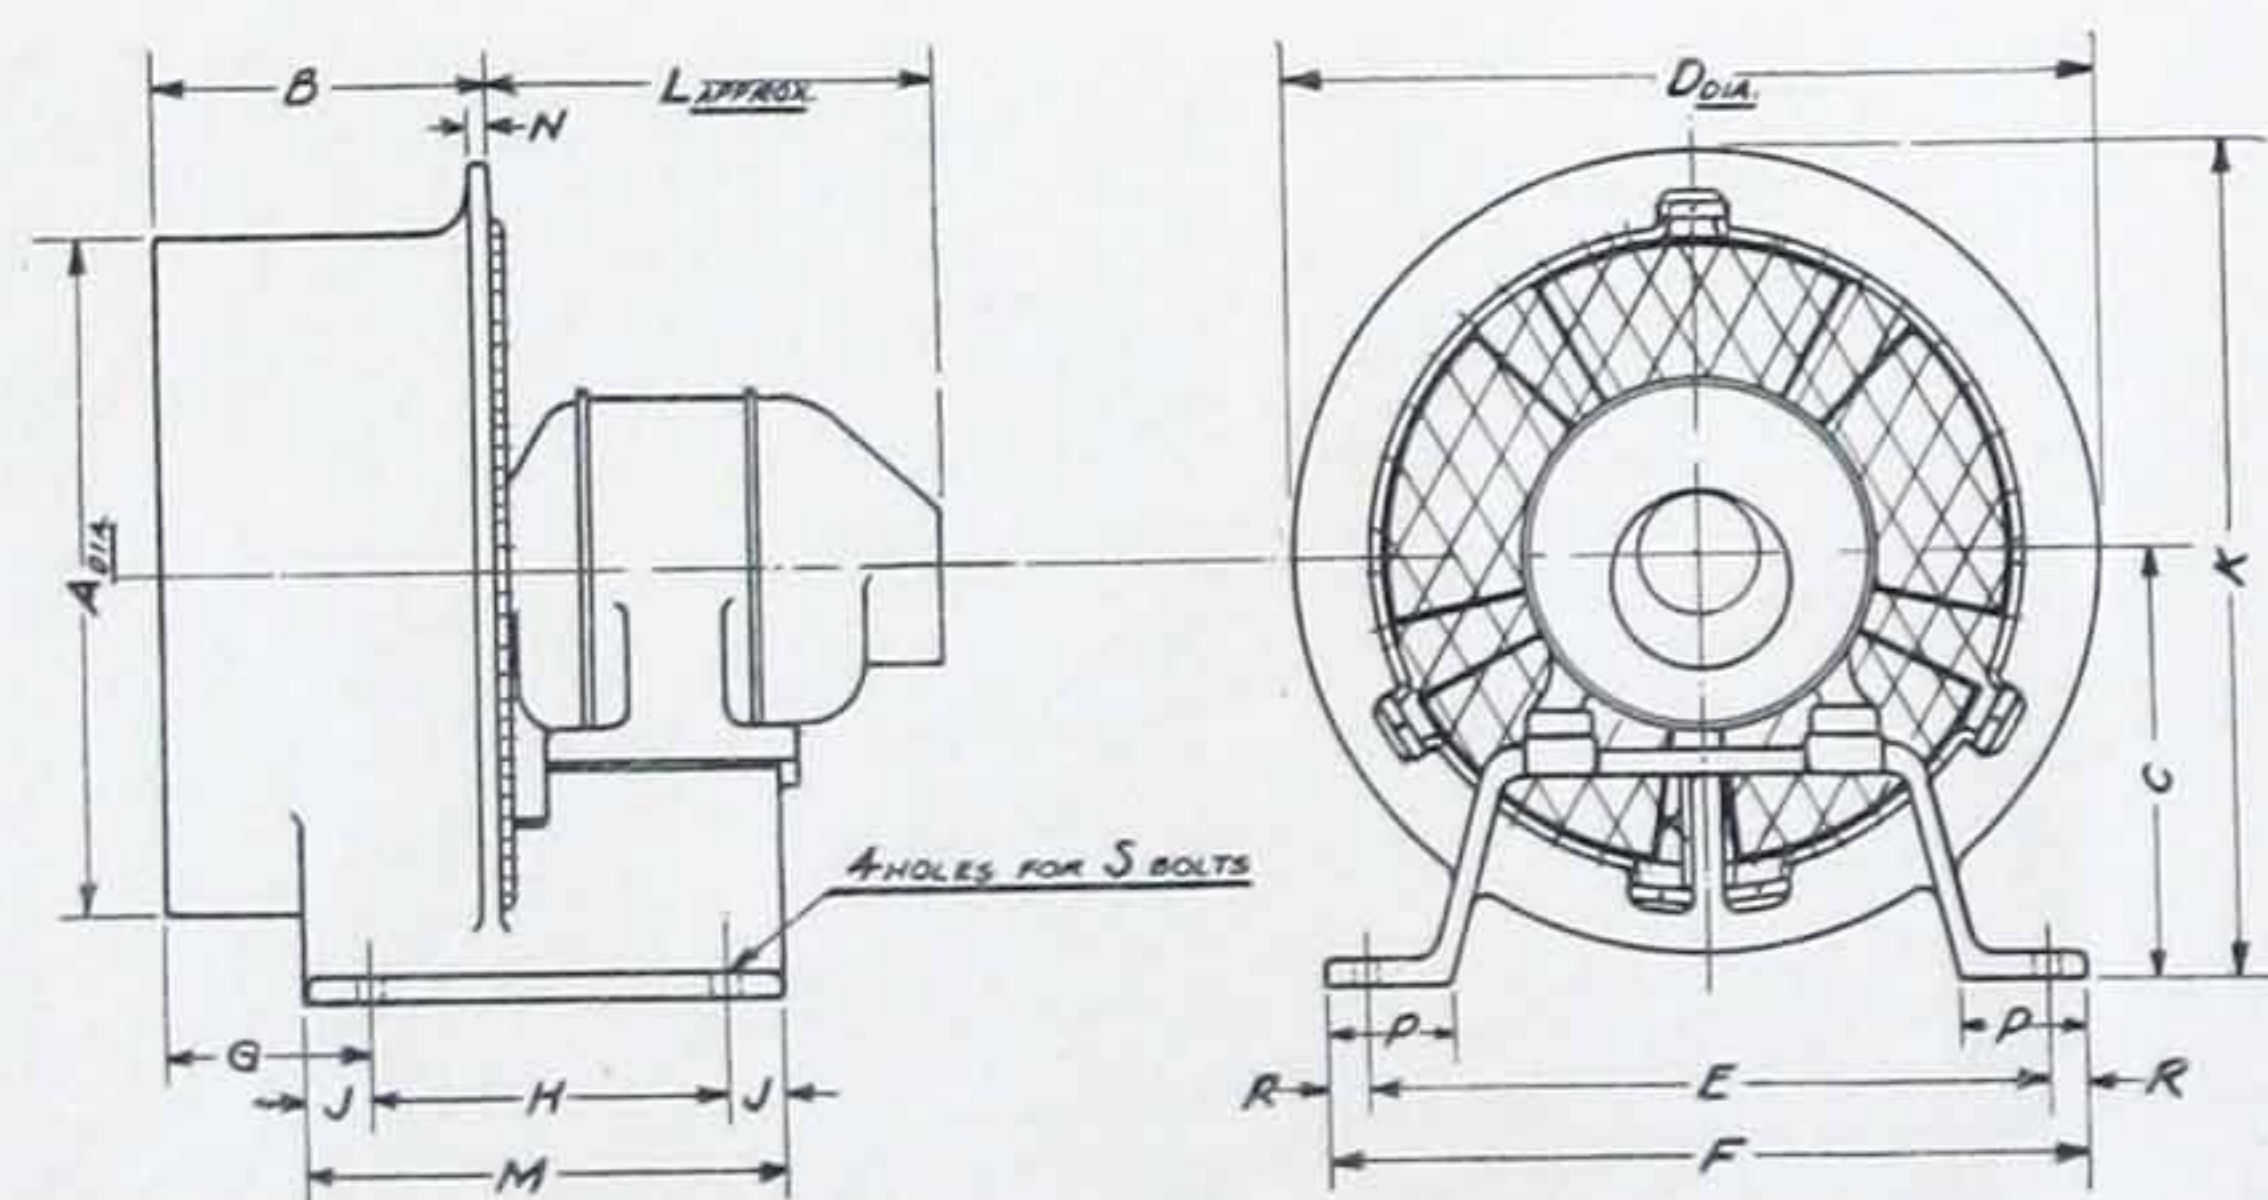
Dimension drawing, sizes 1S to 7S. (These units can also be furnished with long casings, as in Fig. 2.)
